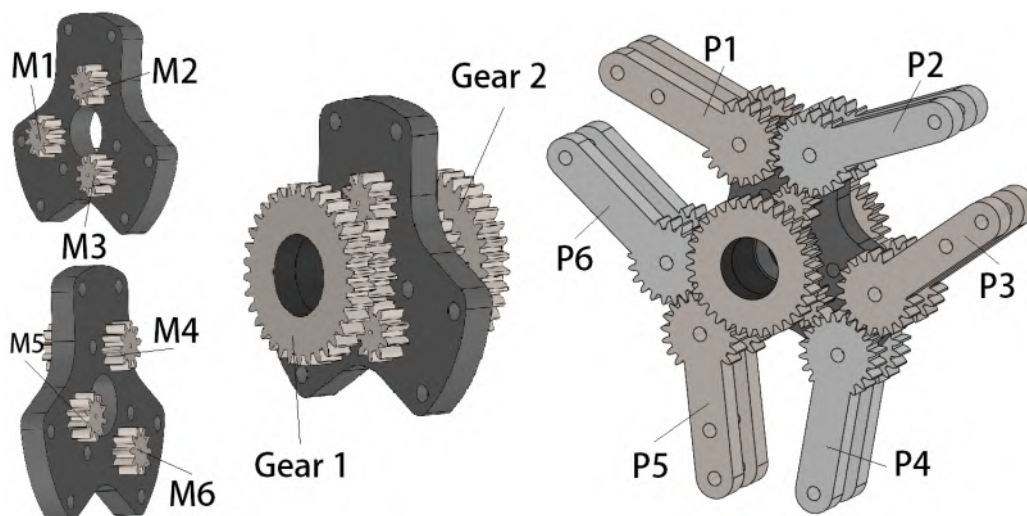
The center gears of the Ring mechanism, Gear 1 and 2, are placed on opposite sides and are driven by two actuators. The next round of gears consists of six Moon gears, named M1, M2, M3 on one side, and M4, M5, M6 on the other side. The Moon gears on each side rotate in the same direction. The Moon gears are connected to planetary gears or arms named P1 to P6. The P1-2, P3-4, and P5-6 gear pairs control the deployment of sensors or modules.
